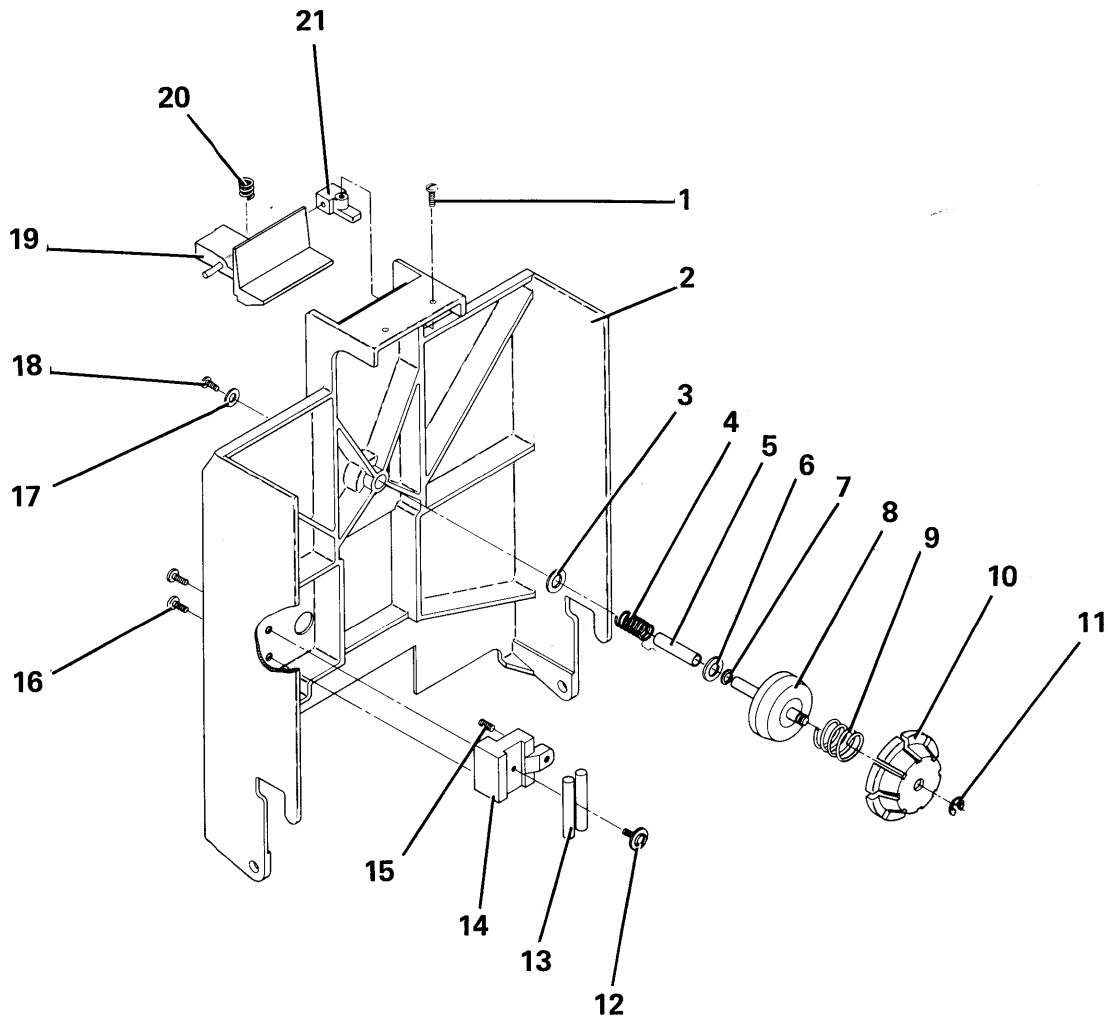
COVER ASSEMBLY. SEE LIST 19.
